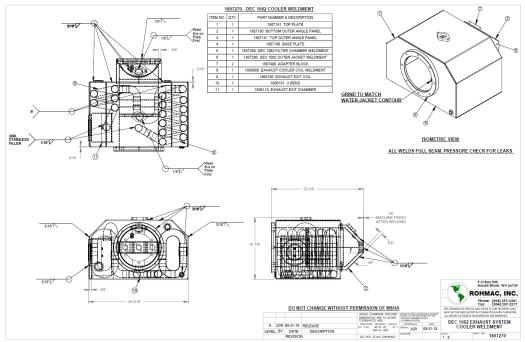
Updated Exhaust Cooler Weldment Drawing
